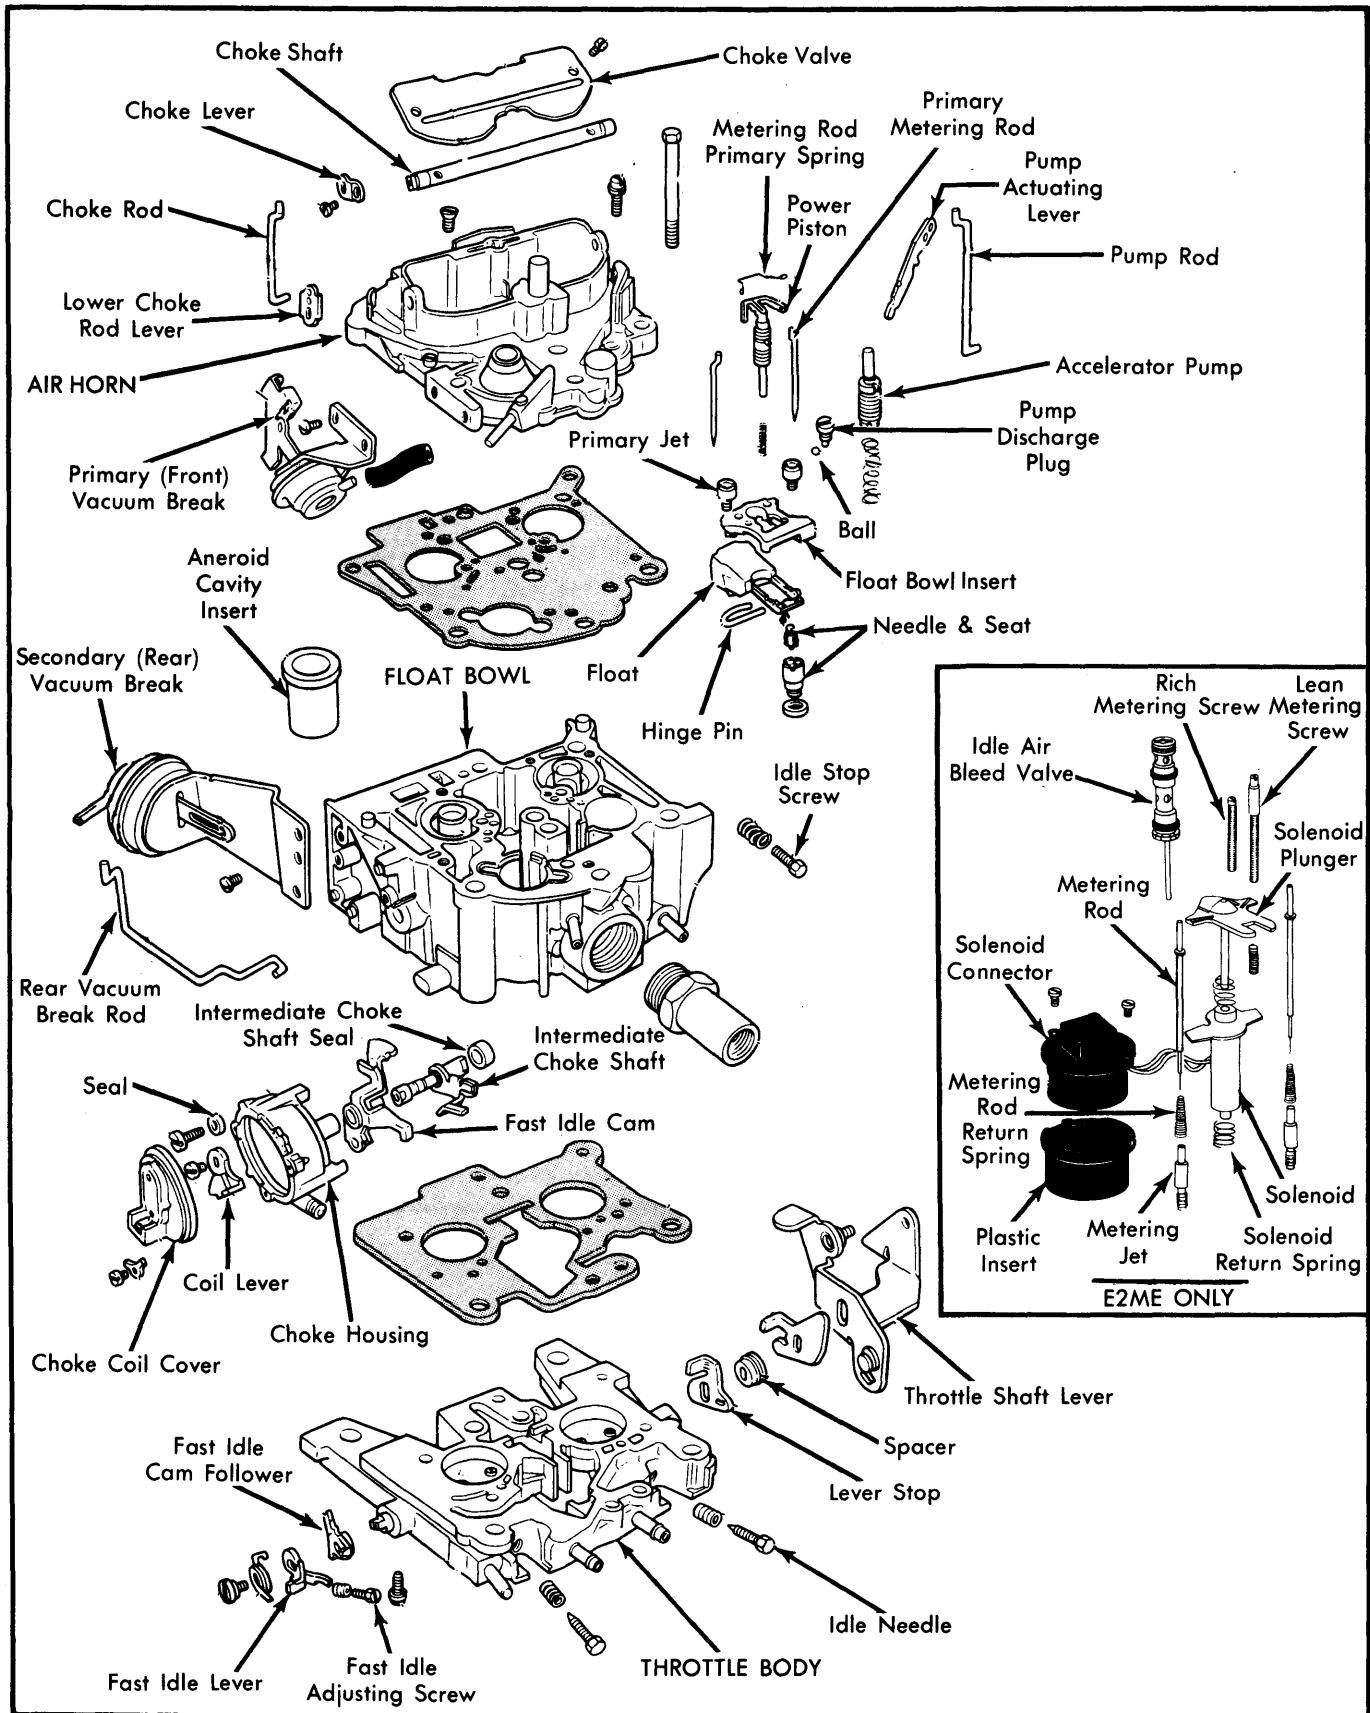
Exploded View of Rochester Model E2ME, M2ME and M2MC 2-Barrel Carburetor
